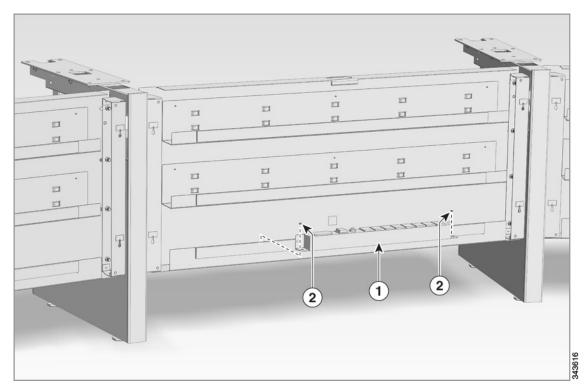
Installing the Power/Ethernet Outlets to the Outside Table Legs
